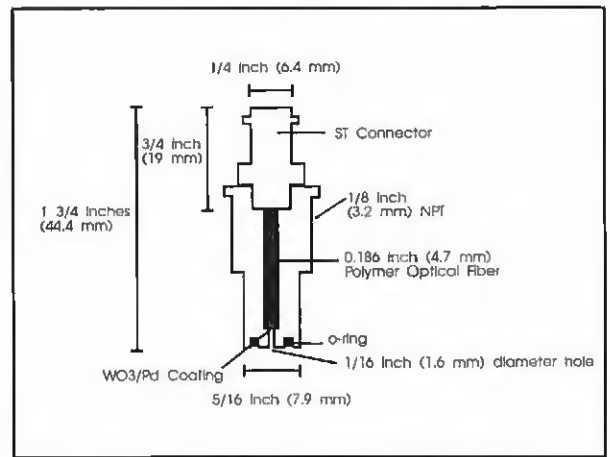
Design for prototype diffusible-hydrogen weld sensor.
